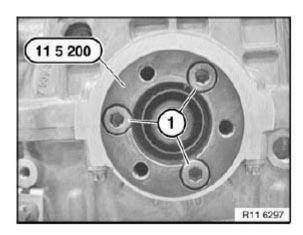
Tightening Special Tool (11 5 200) With Screws Courtesy of BMW OF NORTH AMERICA, INC.
